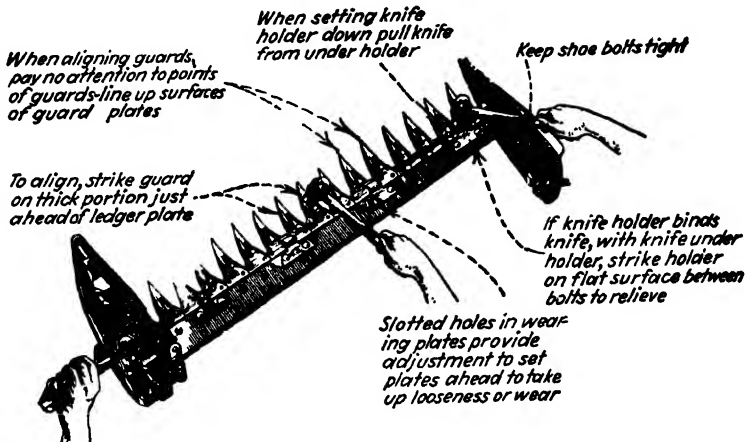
Complete mower cutter bar with instructions for adjustments.
